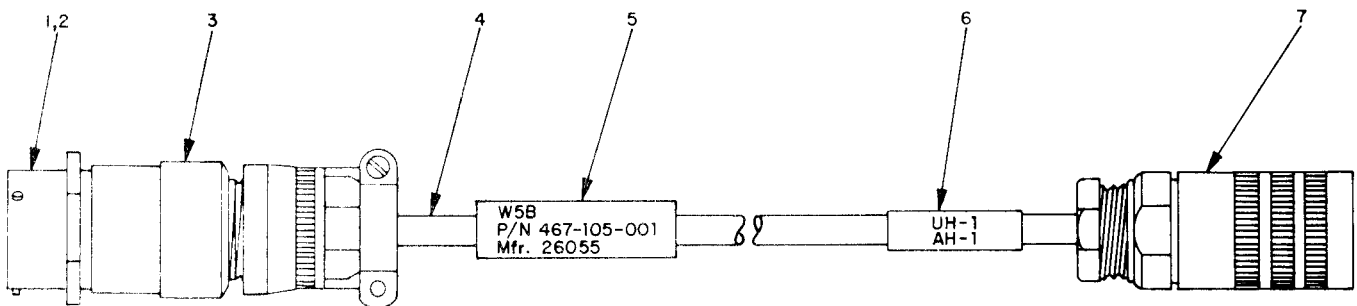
Adapter cable assembly W5B, part number 467-105-001
